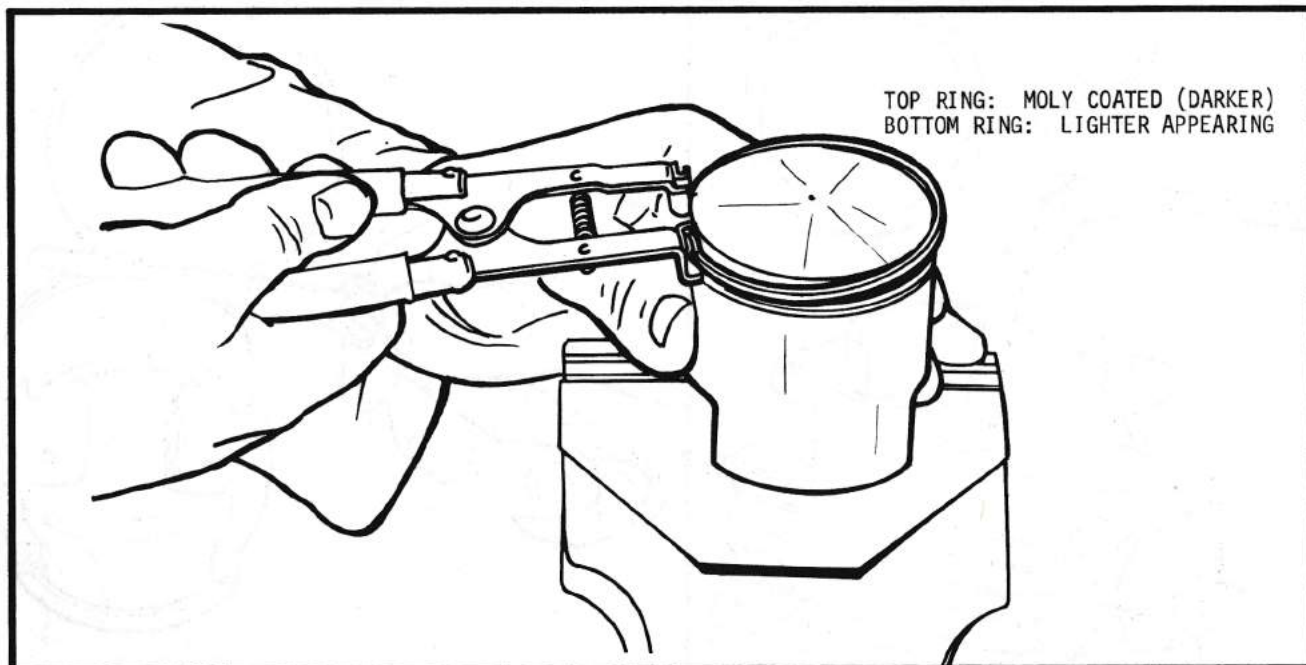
USE RING EXPANDER WHEN INSTALLING NEW RINGS
